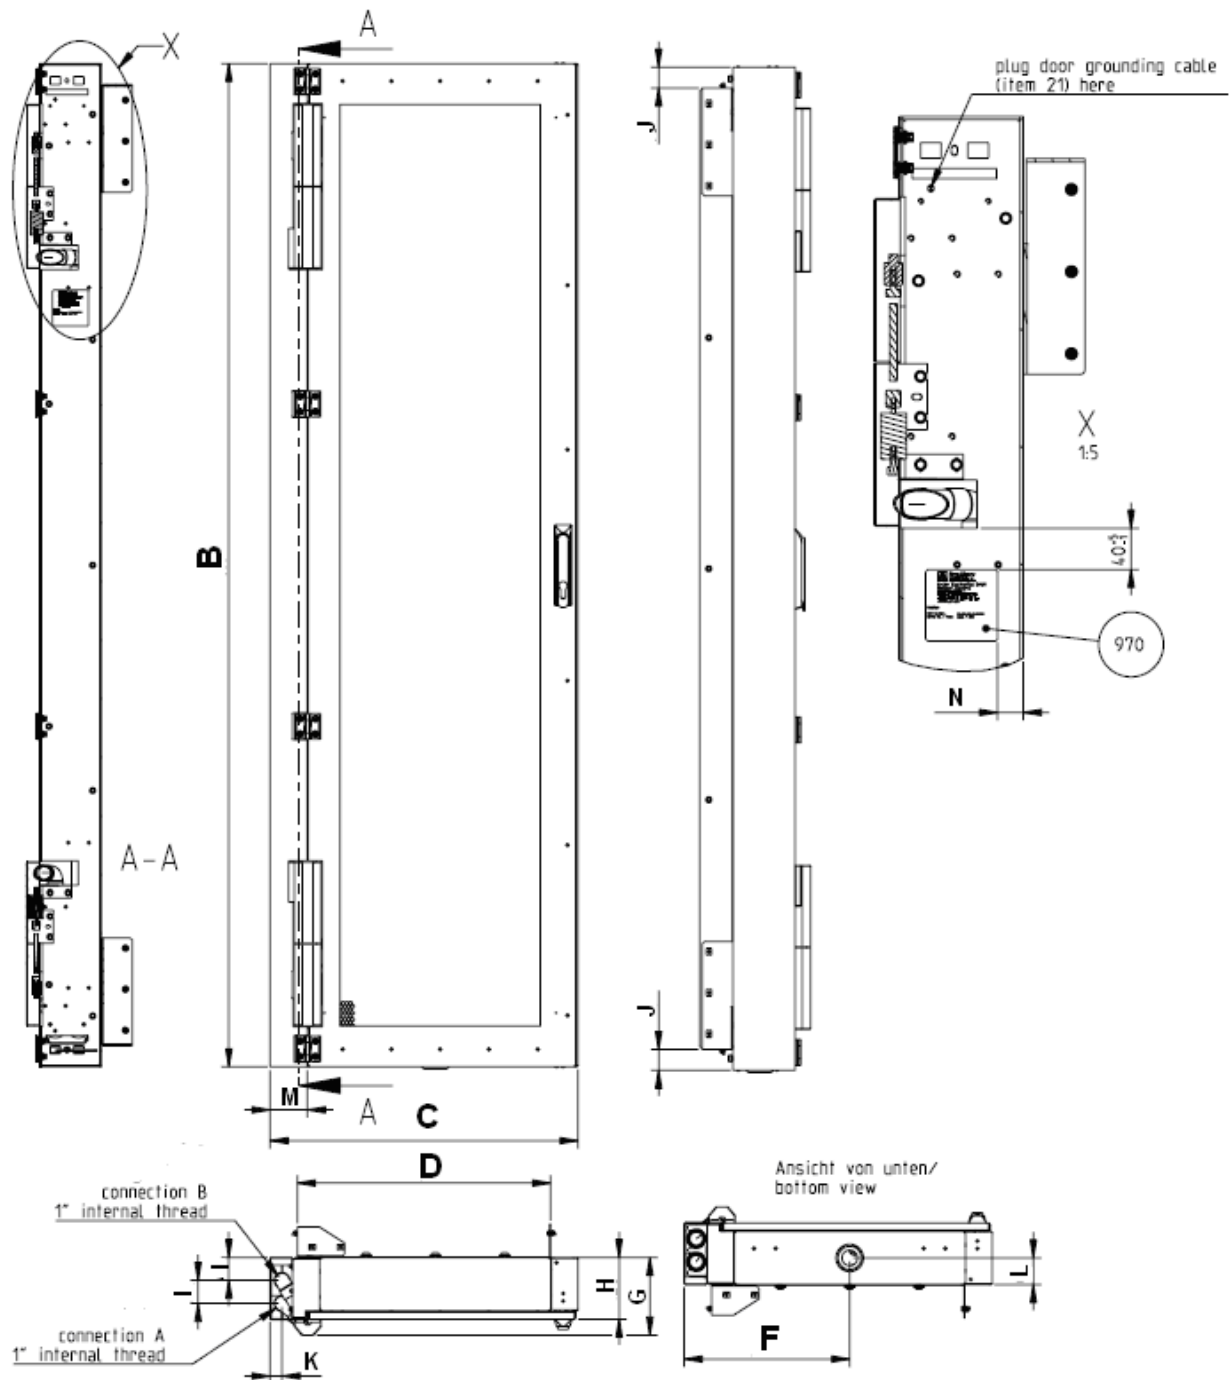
Submittal drawings – ENP DCD (left hinges)
